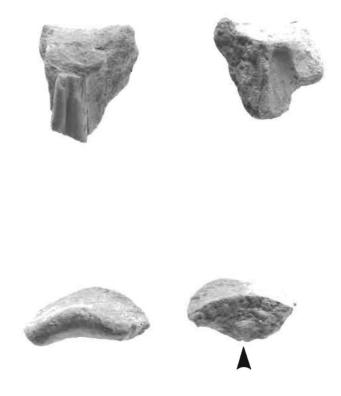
Fragments of sprue cup. The top two show that the cup was attached to the ends of the handles. Other pieces, below, viewed from above the cup show its circular form. The bottom right fragment still has a piece of handle mould attached. The groove of the handle can just be made out and is indicated by the arrow.
